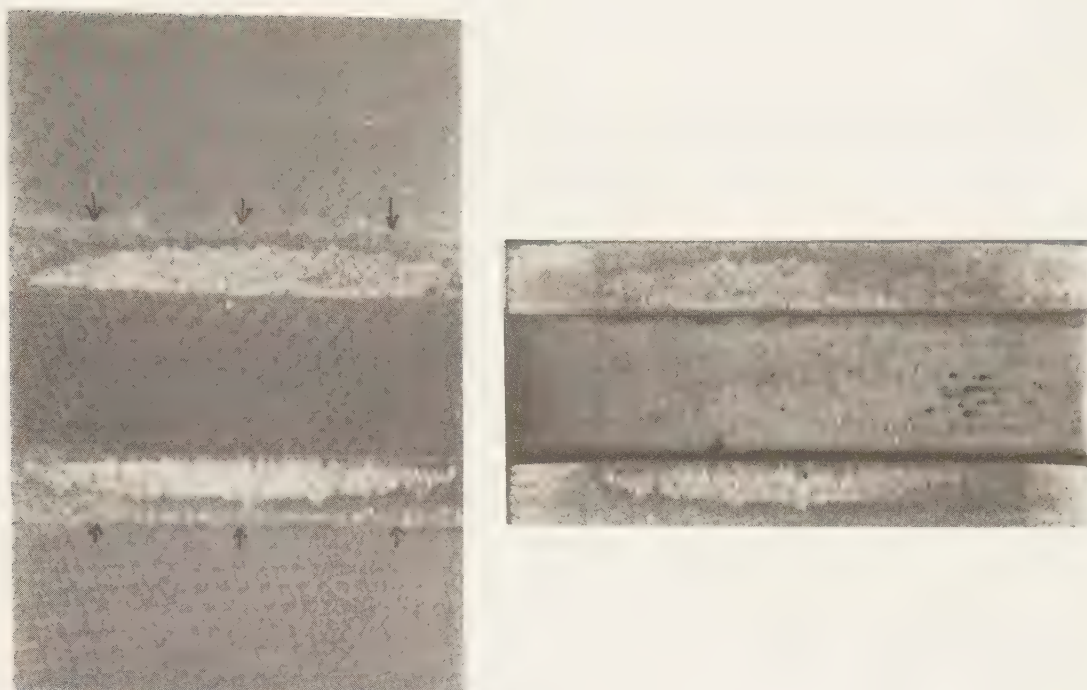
Wear pattern on test piece and pads after fatigue test.
